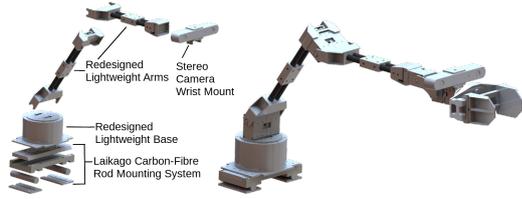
Labelled exploded view (left) of the redesigned and additional parts assembly, and (right) whole robot arm assembly.
